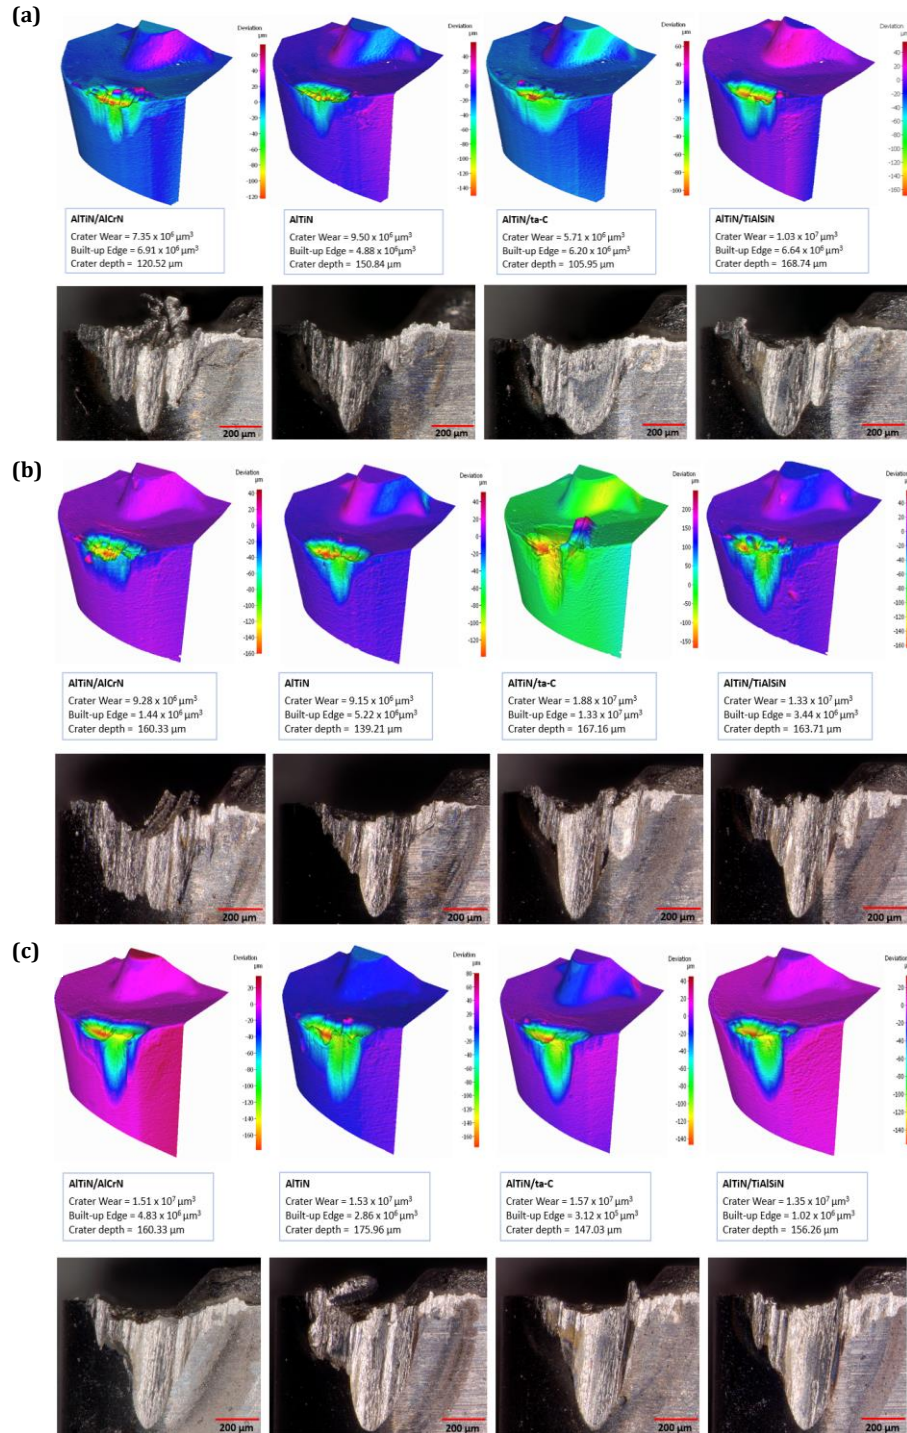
Figure 5. Three-dimensional volumetric datasets and optical images of the coated tools highlighting the amount of crater wear and BUE formation after tool failure (end-of-life) at (a) 150 m/min, (b) 175 m/min, and (c) 200 m/min
